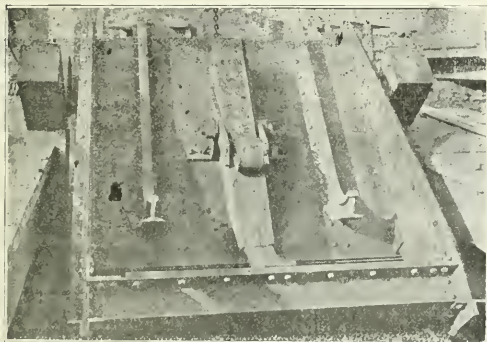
VIEW OF RAILS AFTER BEING CUT
